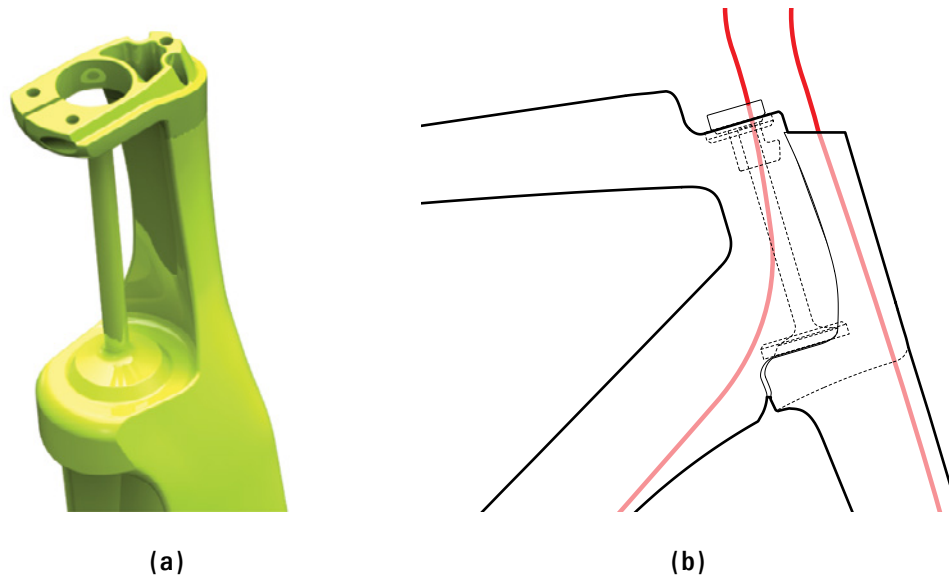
(a) Hollow headset bearing assembly, with compression cap (top) and internal tensioning rod. (b) Cable path through top bearing.
